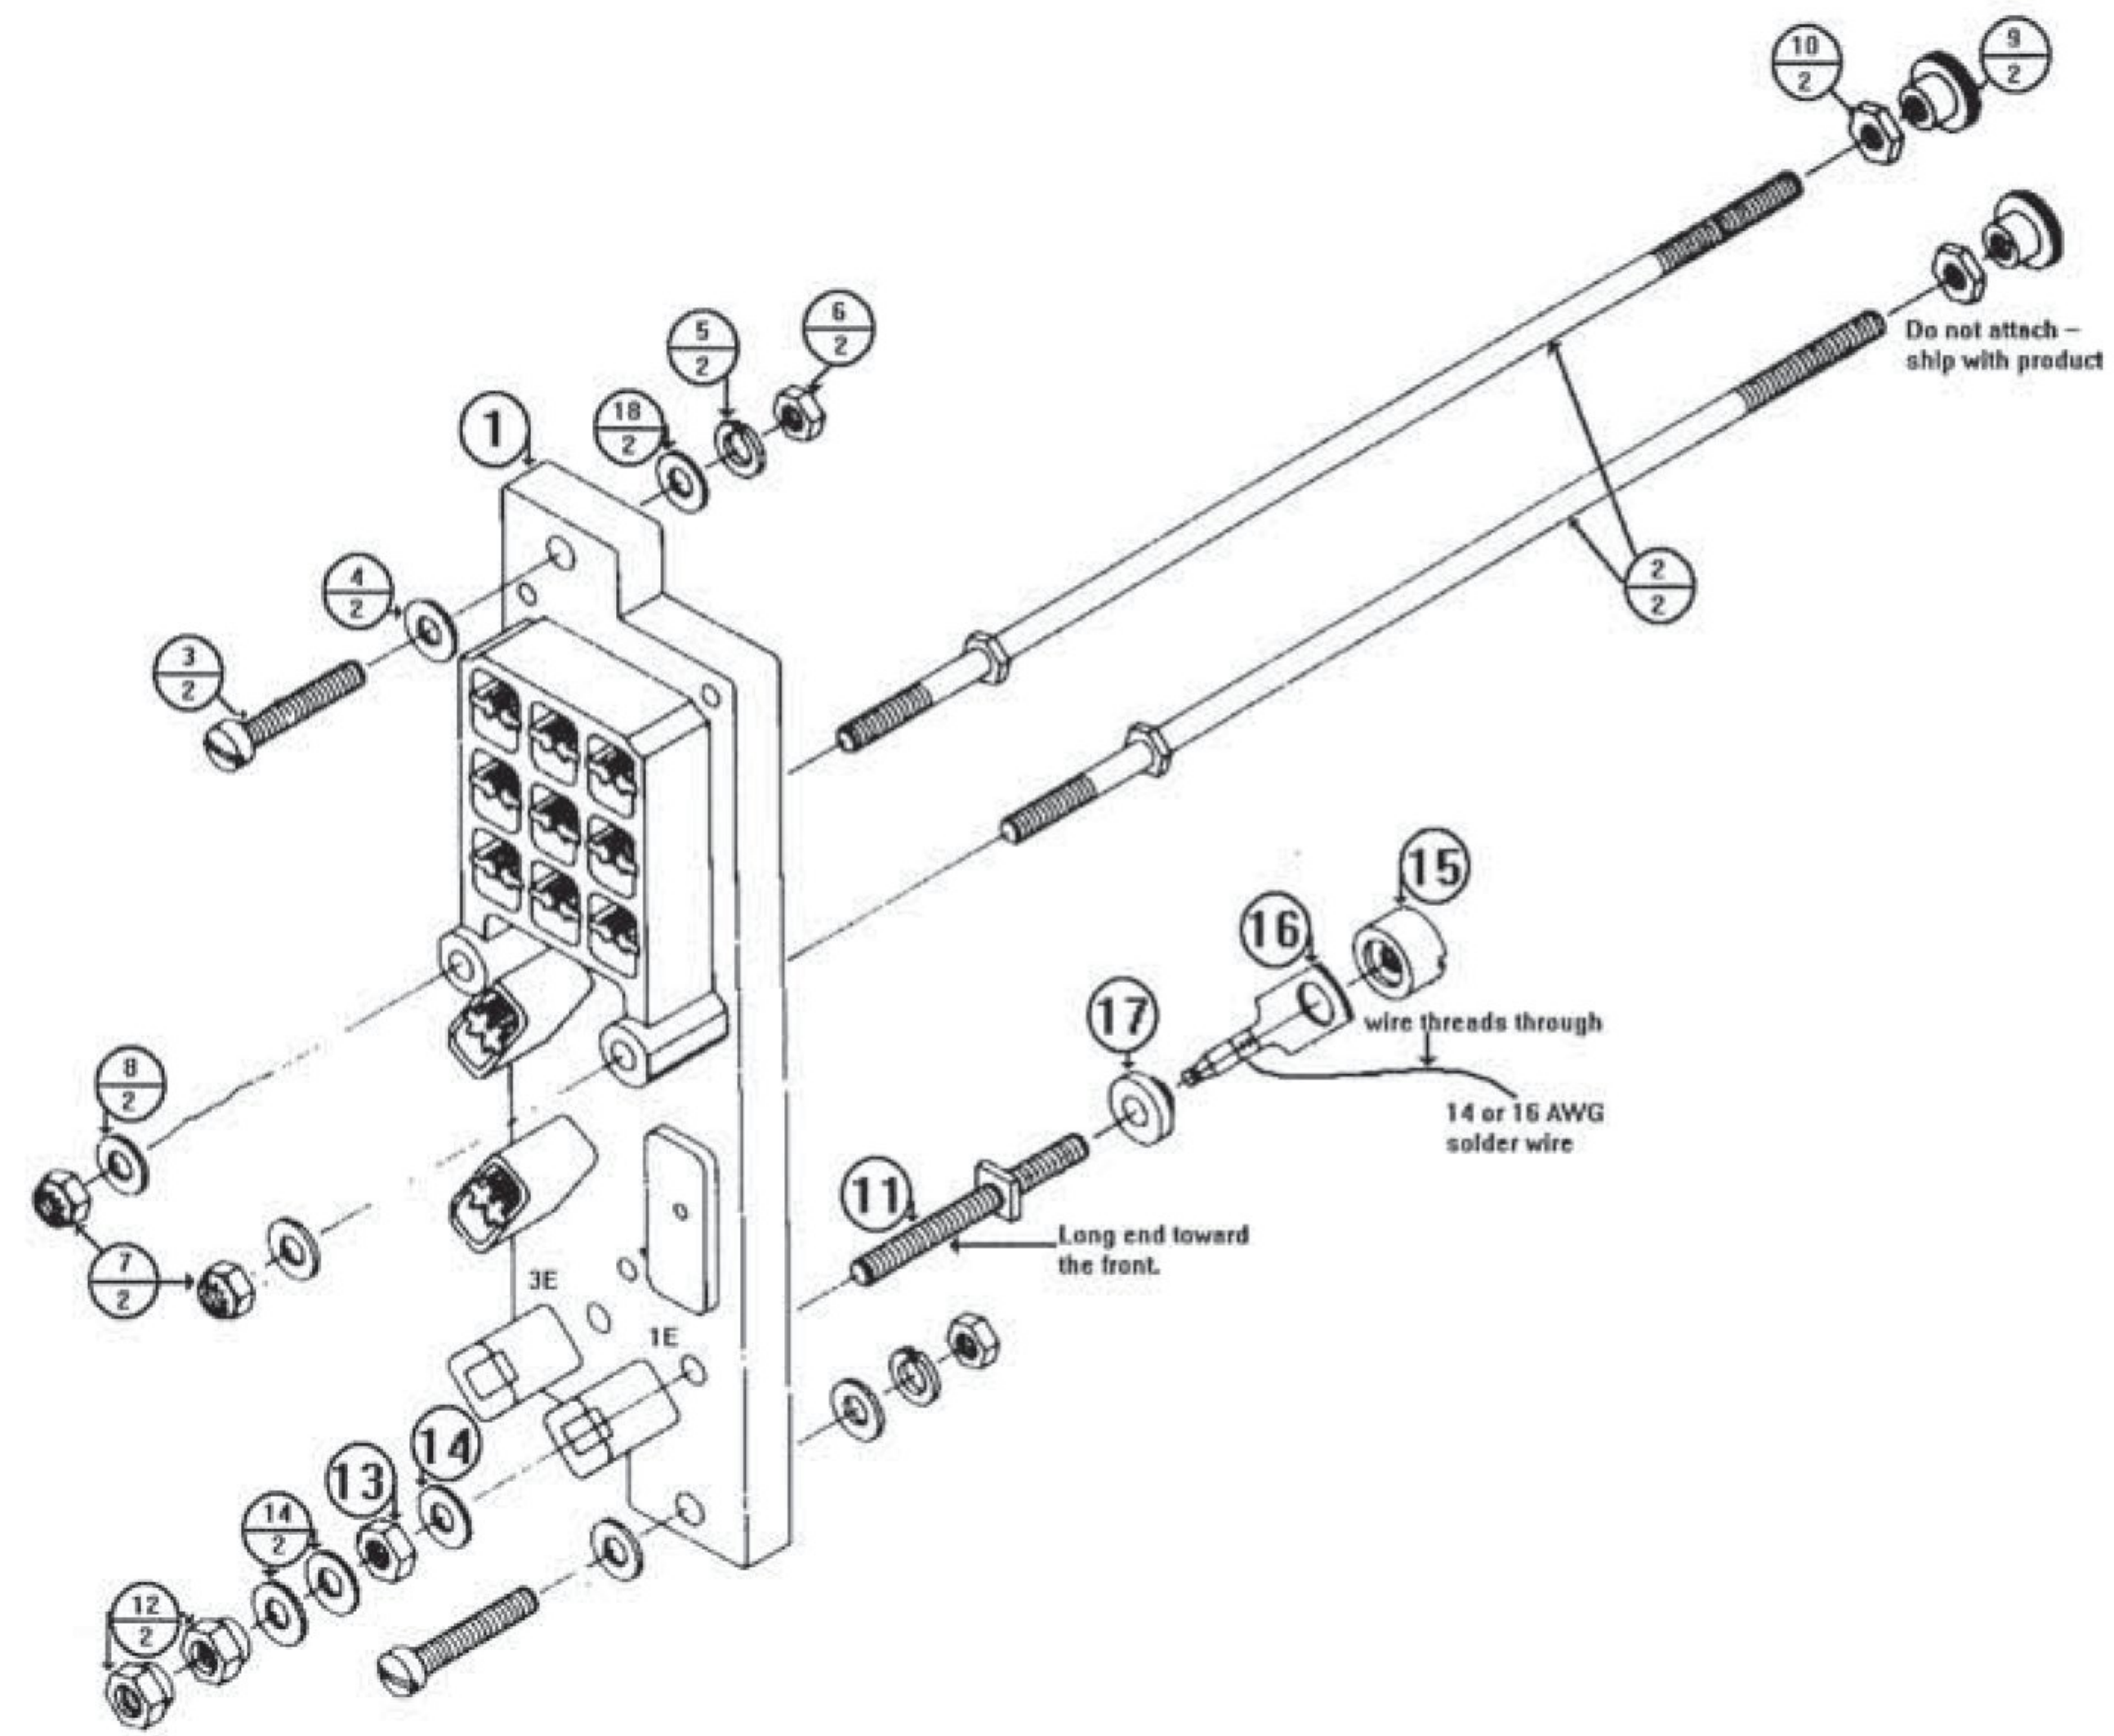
B1 RELAY PLUGBOARD ASSEMBLY
